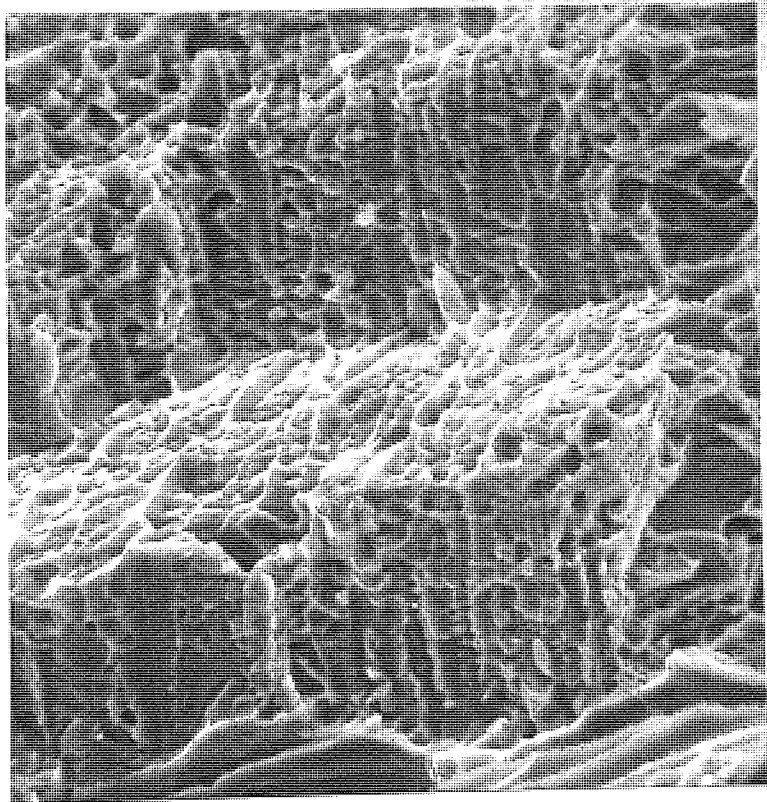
(b) STEPS ON FRACTURE SURFACE IN DOUBLE
